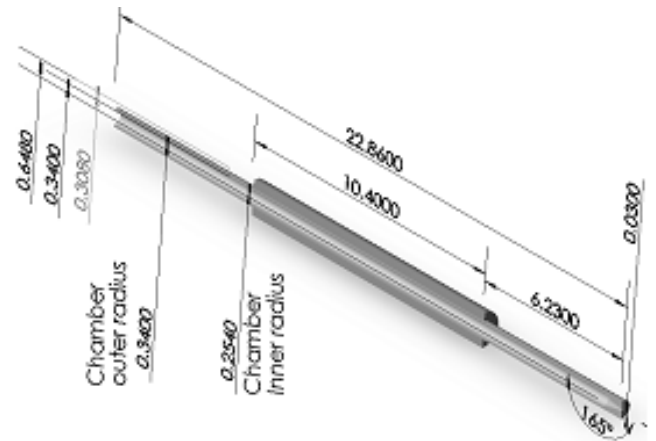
Dimensions of MicroFab's single nozzle piezo DOD inkjet print head
